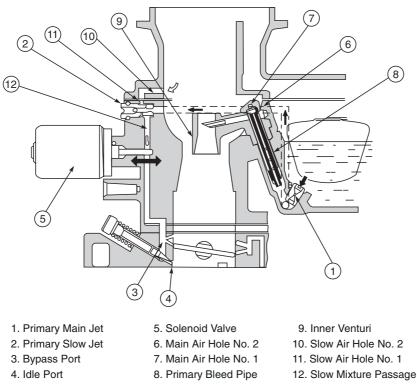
Exploded View of Maruti Solex Carburettor
